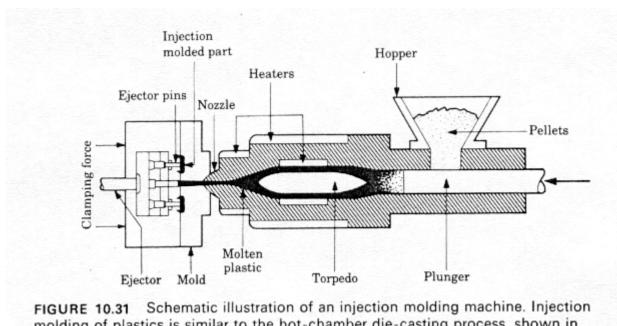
Schematic illustration of an injection molding machine. Injection molding of plastics is similar to the hot-chamber die-casting process, shown in Fig. 5.23.
